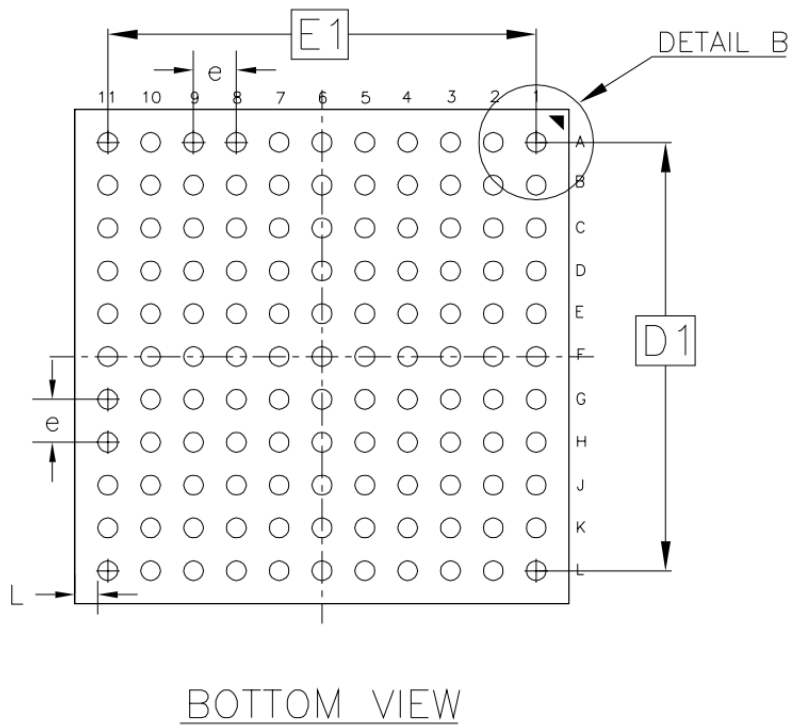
RKNanoD-GLFBGA121 Package BOTTOM View
